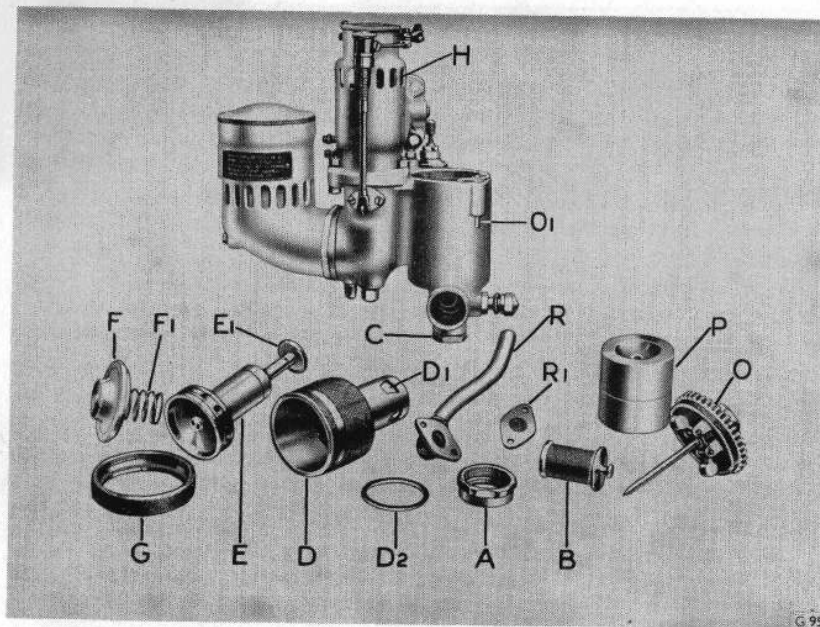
CARBURETTER, WITH CERTAIN PARTS DISMANTLED.
